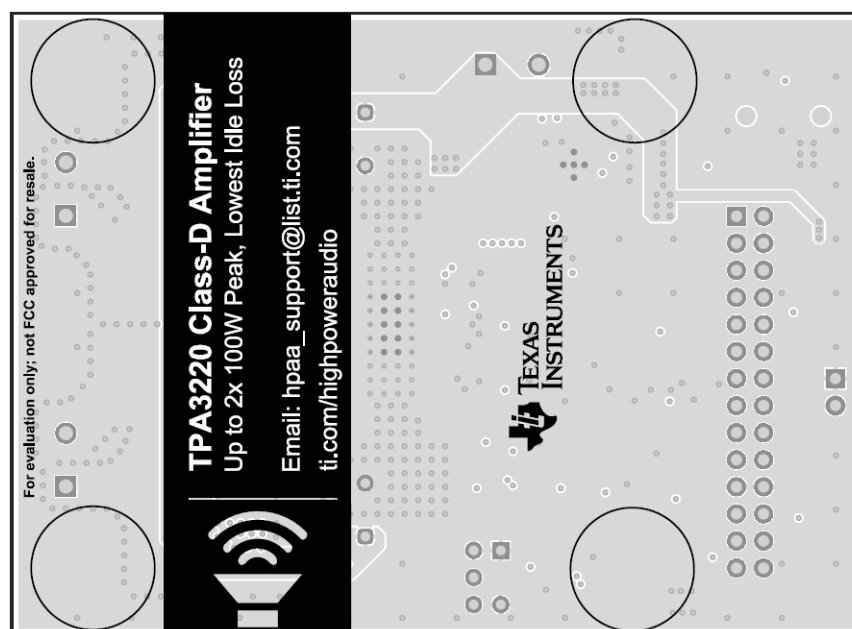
TPA3220EVM-Micro Bottom Composite Assembly
